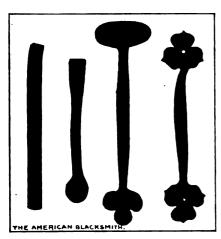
PROCESS OF FORGING A DECORATIVE HANDLE.
